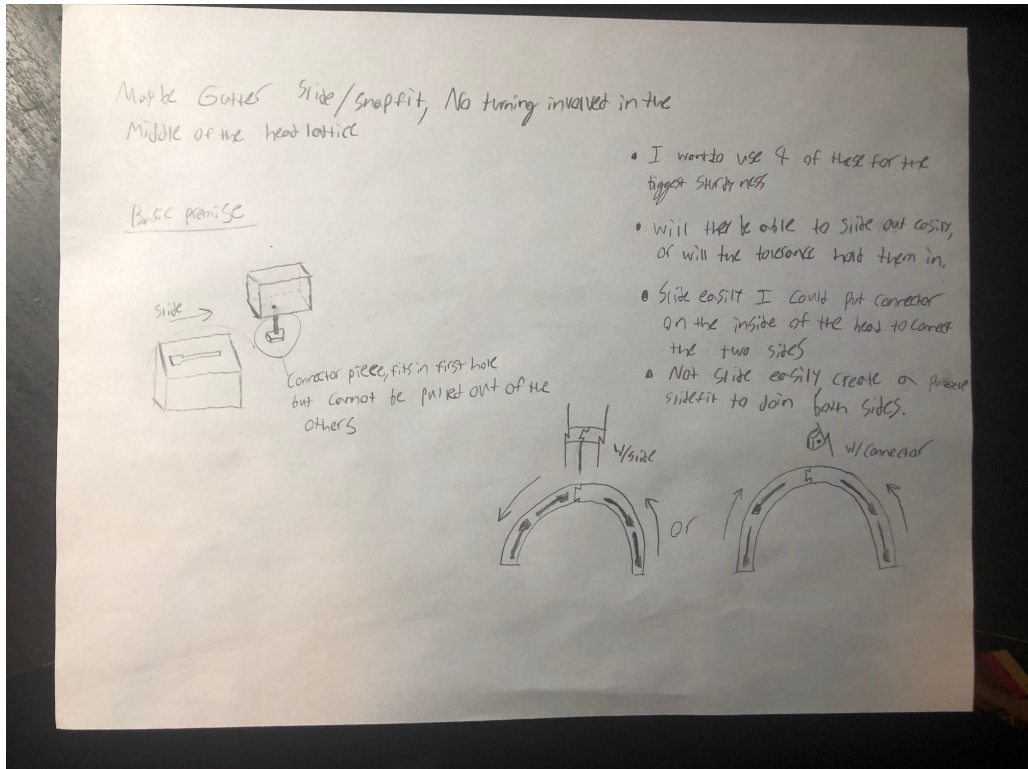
Neck Slide fit design utilizing gutter style slide-fits
